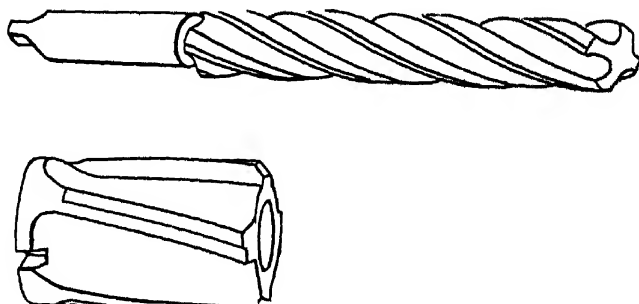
FOUR-FLUTED TWIST DRILL FOR ENLARGING HOLES, AND SHELL DRILL, HELD ON AN ARBOR
